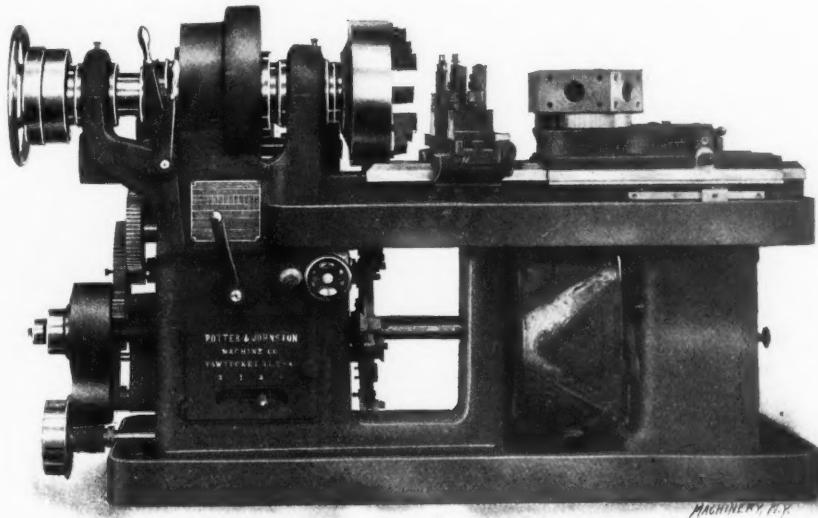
Potter & Johnston Automatic Chucking and Turning Machine, with Two-speed Geared Spindle Drive.
